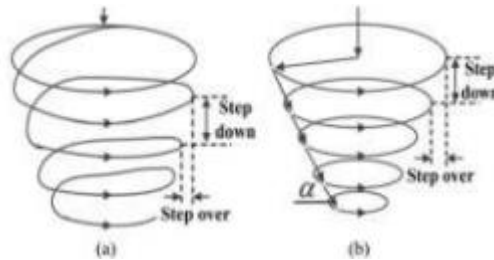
13 Tool path definition (a) helical or spiral, (b) Step wise with draw angle alpha.
